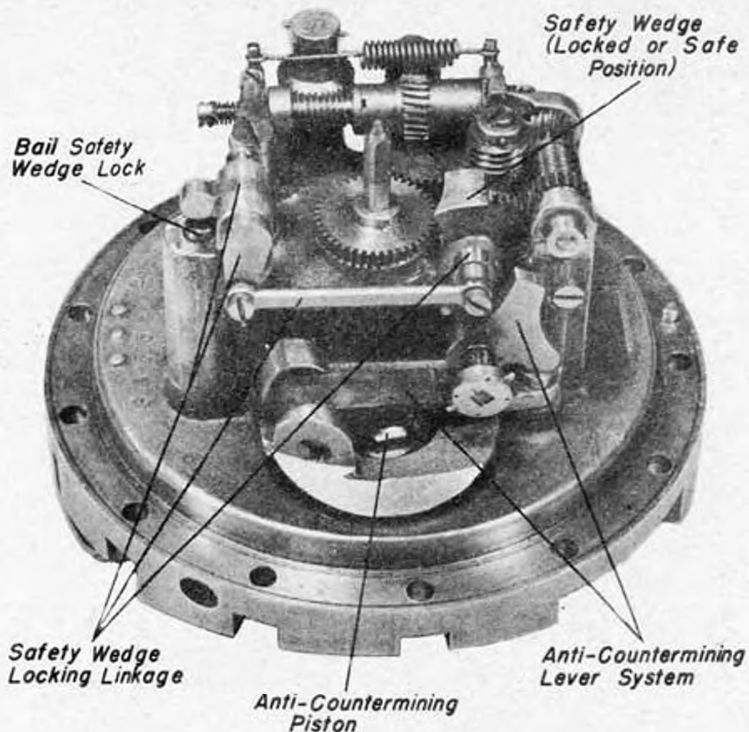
Exploder Type 2 Arming Assembly, Left Side
